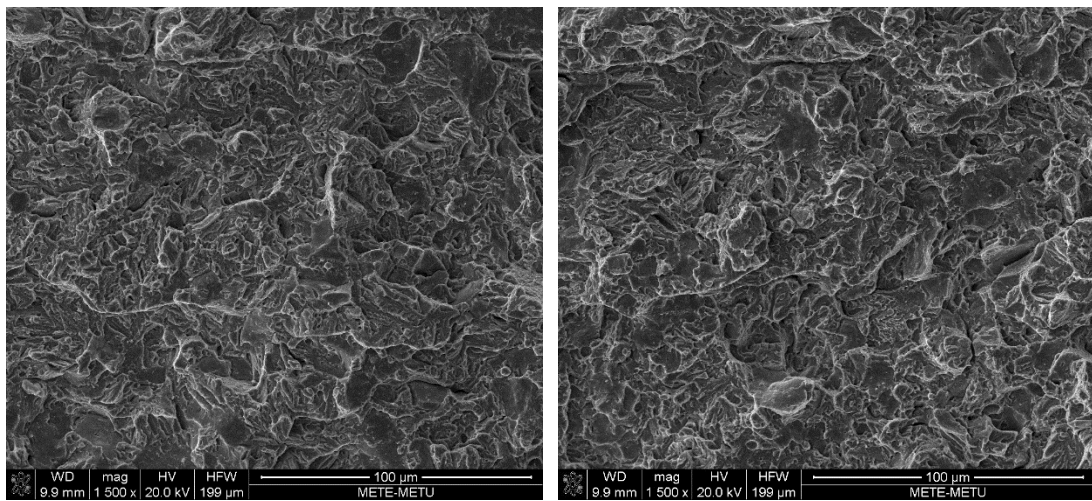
Fracture surfaces of Charpy impact test specimens of lower bainite transformed at 270°C, 80min (higher magnification).
